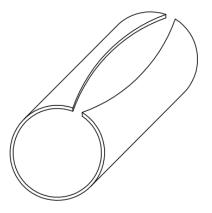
Push moving right or left button and turn the material to some degree. Check pre-bending by means of gauge depending on desire diameter. If pre-bending is correct, then apply same process to opposite edge by reversing material.
